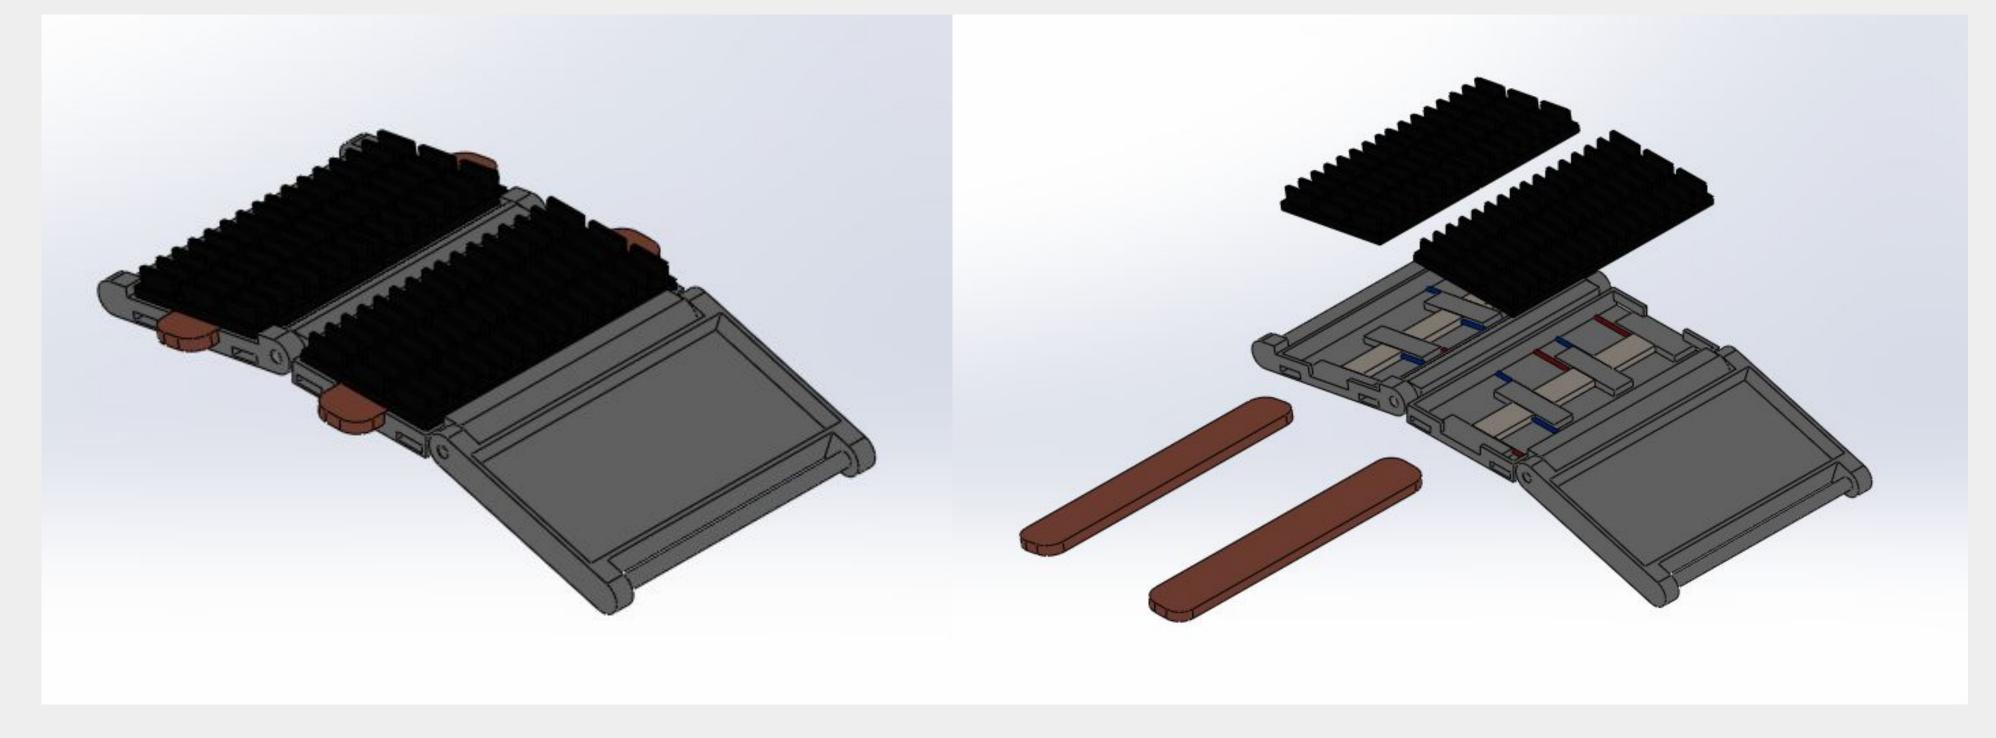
An assembly (left) and explosion (right) of the TEG integrated wearable device.
